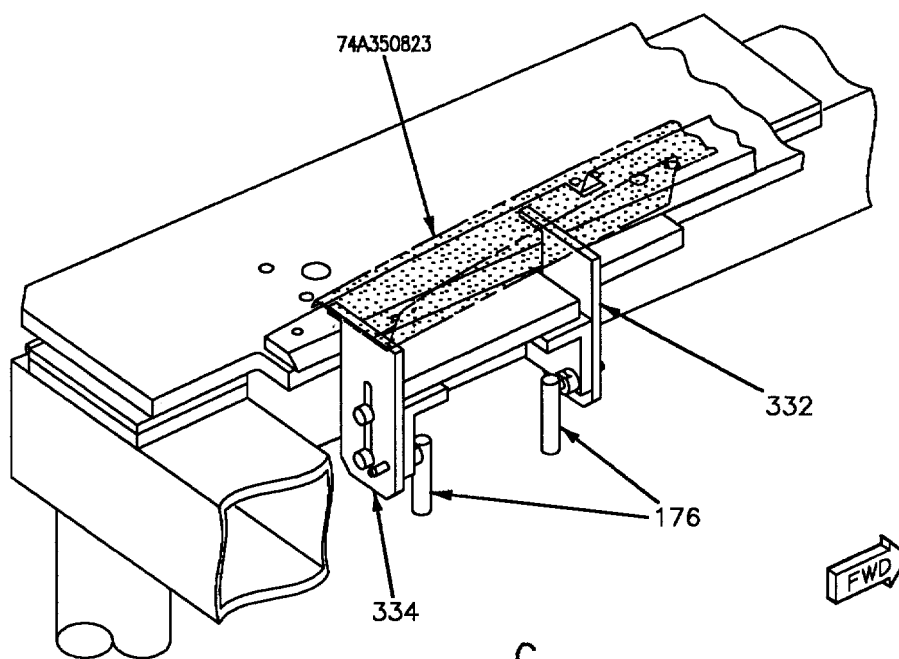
Inspection and Replacement - Aft Seal Retainer (Sheet 2)
